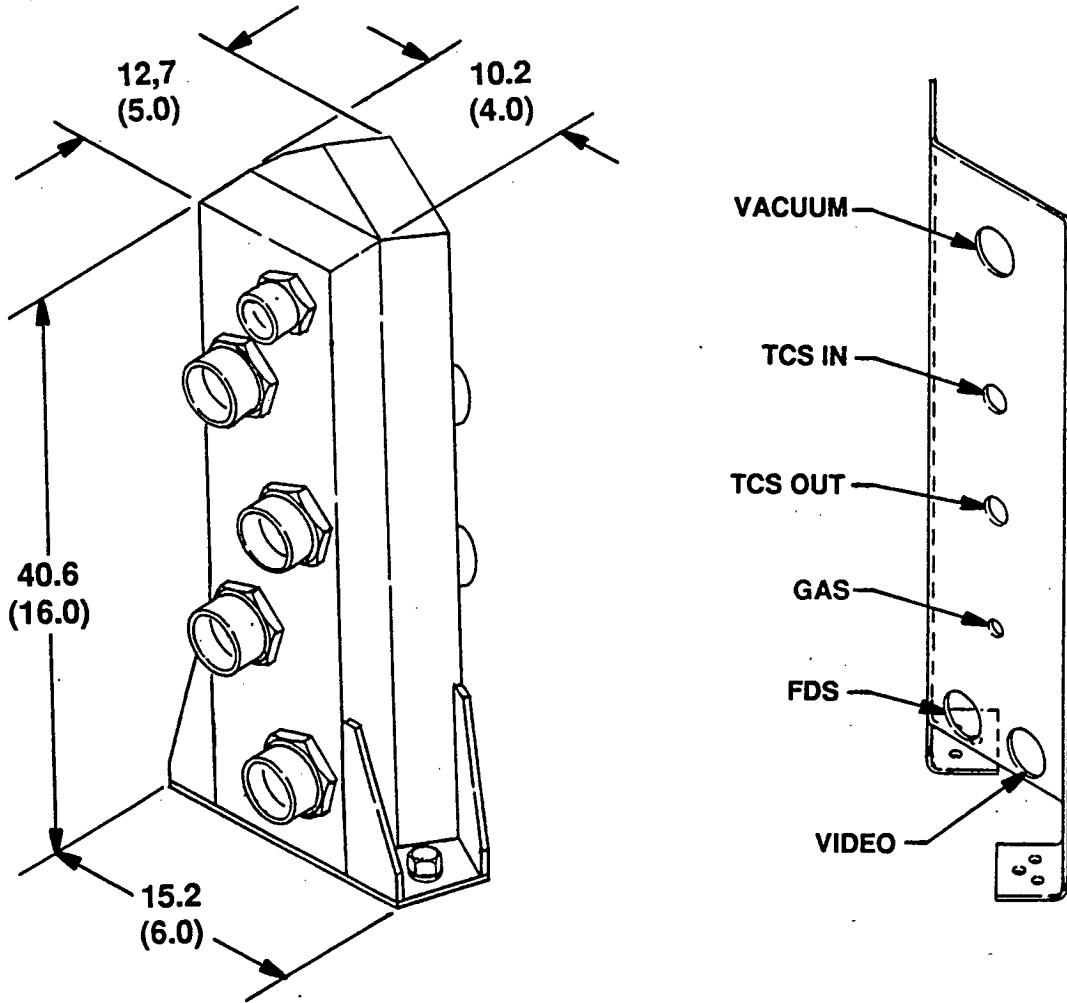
EXPERIMENT RACK-1 PANEL LAYOUTS
